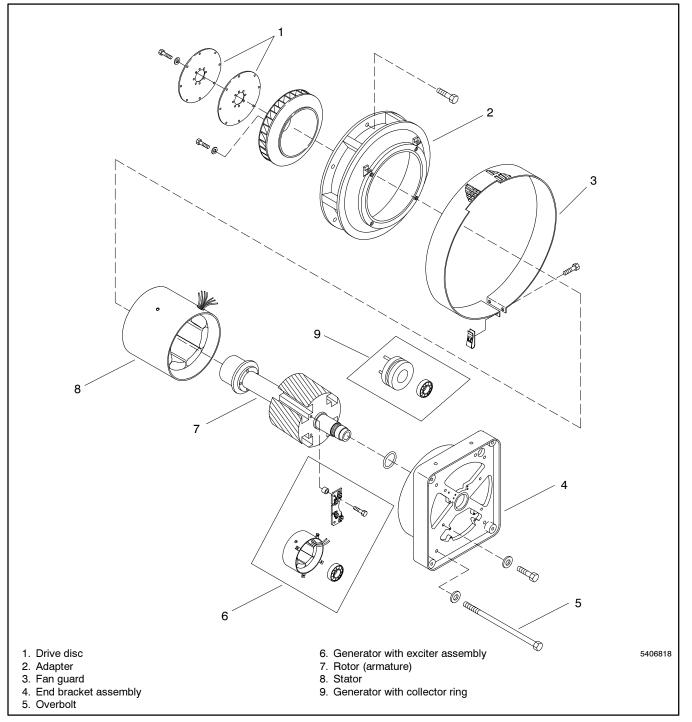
End Bracket Assembly, Stator, and Fan Guard Removal
